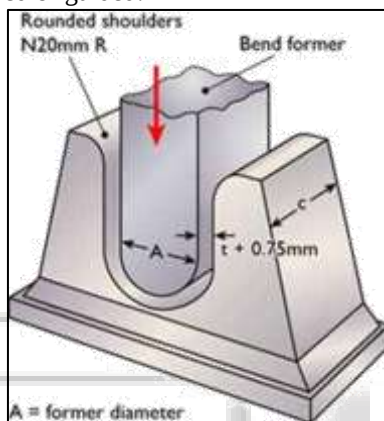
a guided bend test jig that uses a male and a female former, the commonest form of equipment
